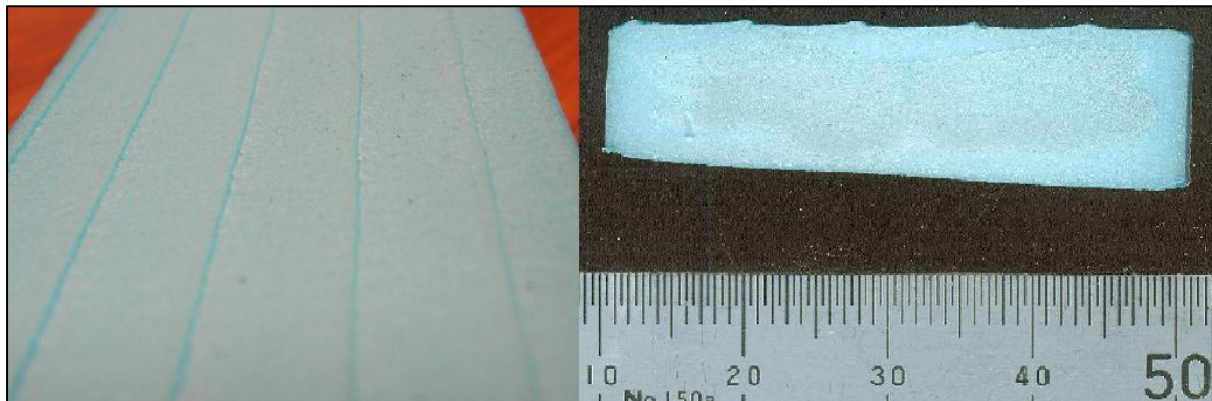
Thermomechanical lay of a surface cut by multi-pass cutting (cross-section on the right)
